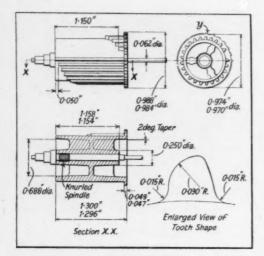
Gear Drum Component for a Prepayment Meter, which Incorporates a Cast-in Spindle. No Taper is Permissible on the Periphery
